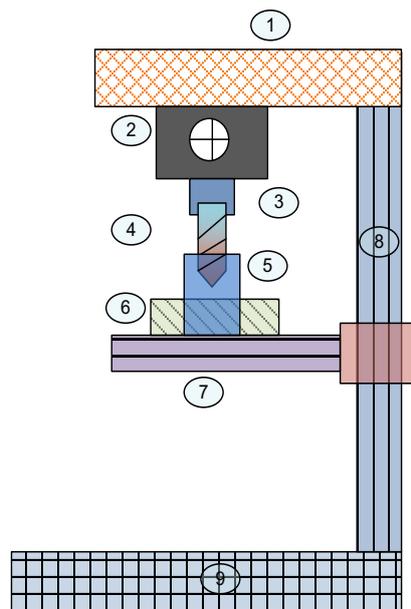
Schematic diagram showing column type drilling machine with different parts 1 overhanging arm, 2 drill head, 3, spindle, 4 twist drill, 5 work-piece, 6 work holding device, 7 work-table, 8 column, 9 base
